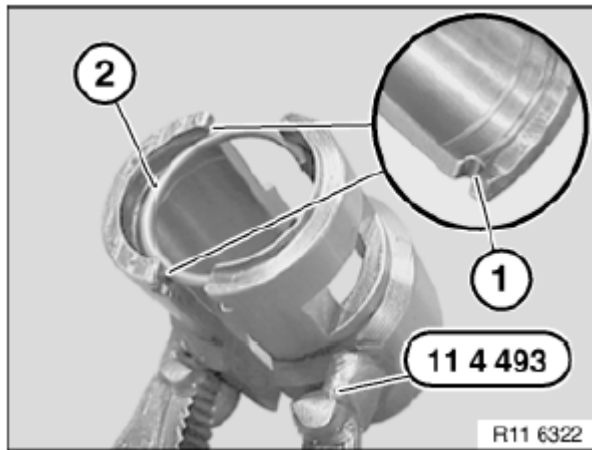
Identifying Special Tool (11 4 493), Piston Circlip And Groove
